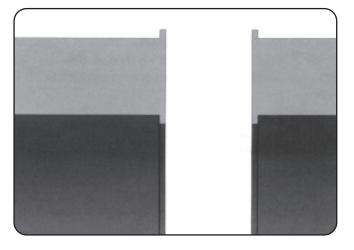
Pressurized heating (alignment) and shape of welding faces afterwards
